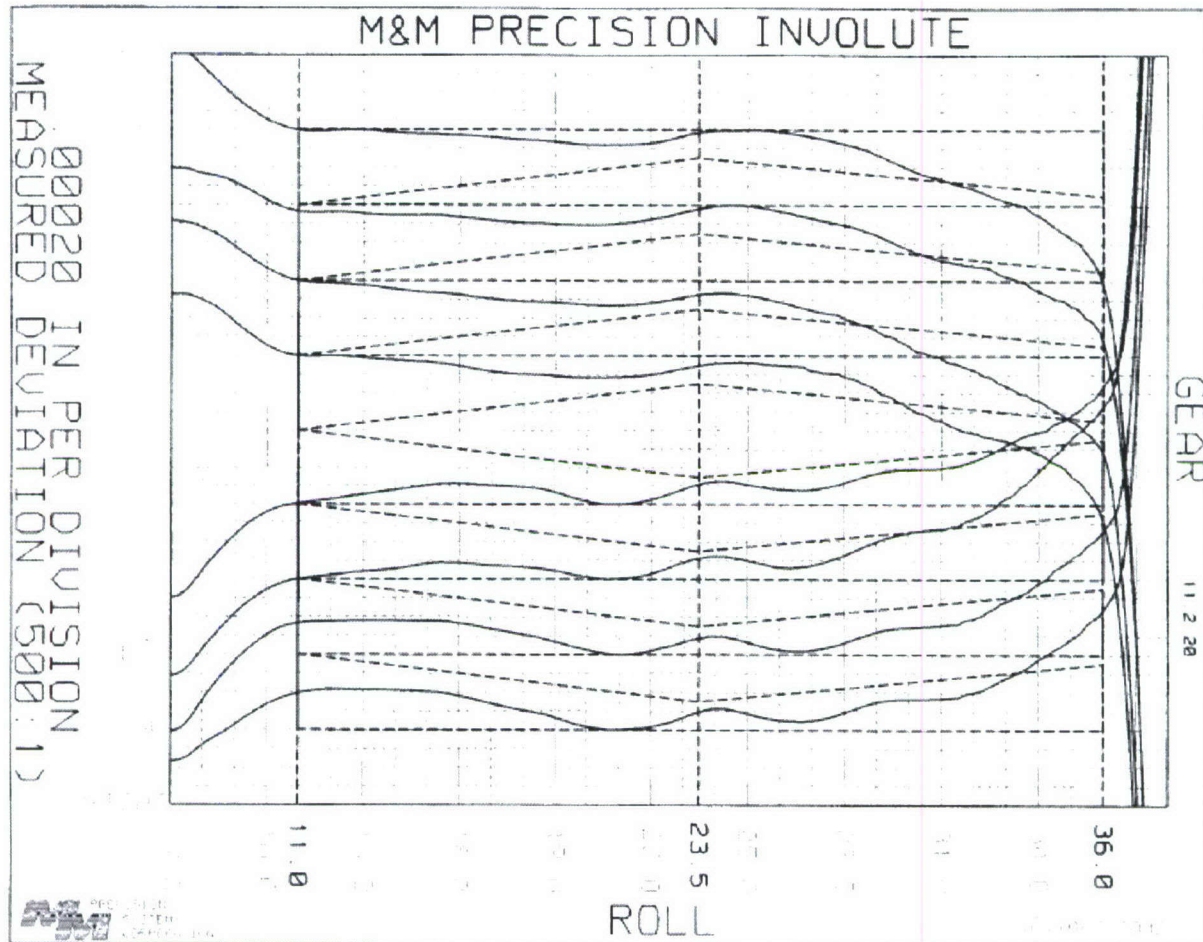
Gear tooth profiles on ausform finished, Standard test gear (grind 4)
